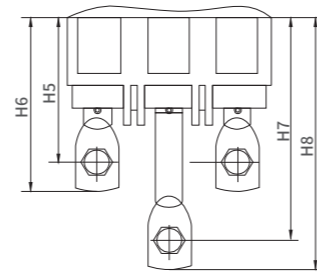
EXM3L series plug-in outlines and mounting dimensions
